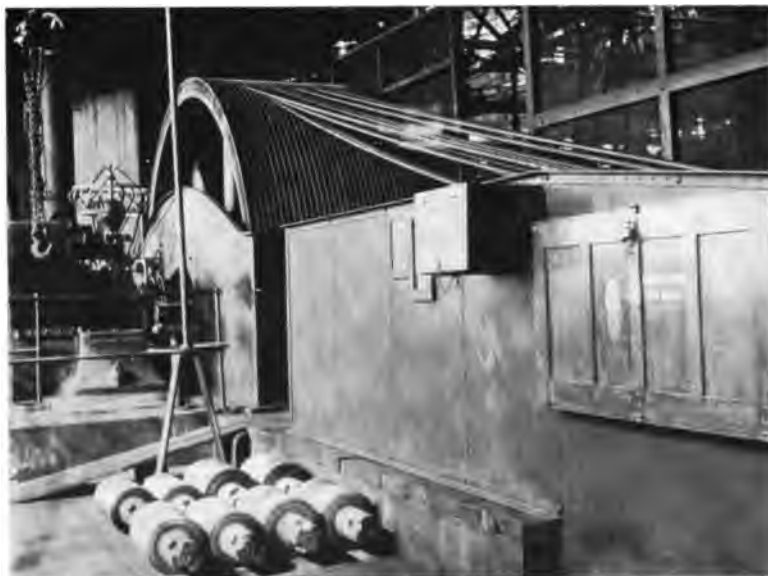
Guarded Rope Drive. (Courtesy of American Steel and Wire Co.)
